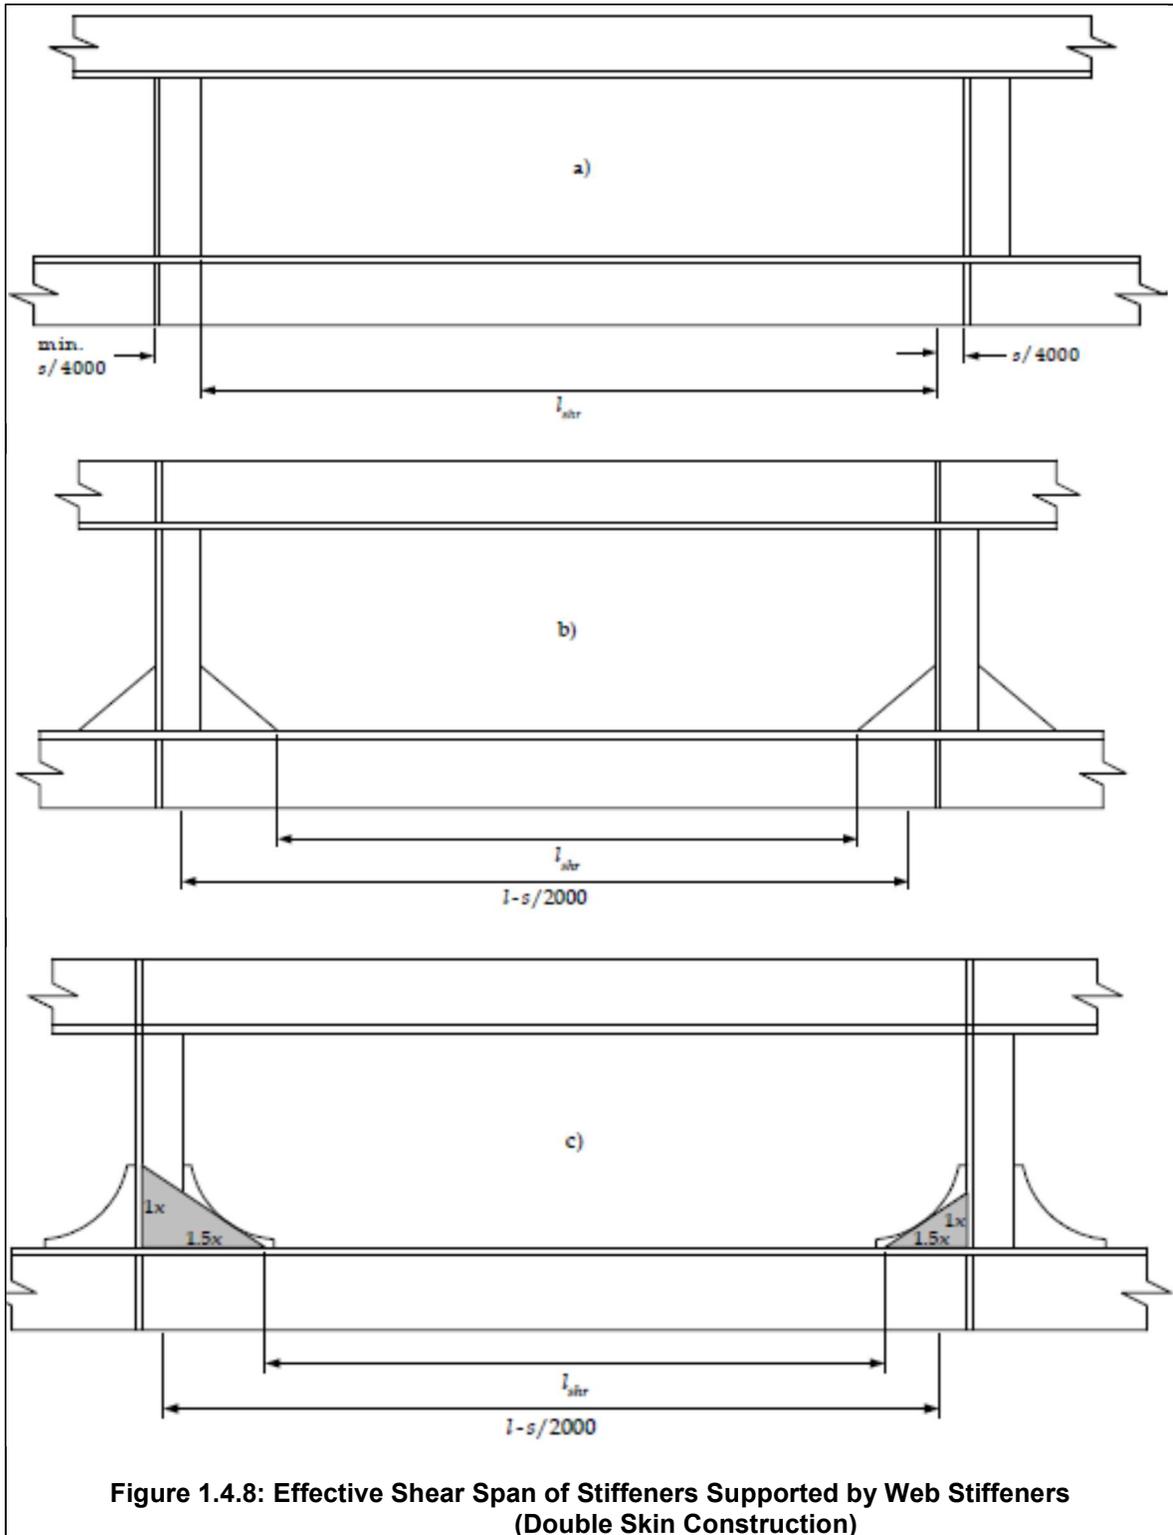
Effective Shear Span of Stiffeners Supported by Web Stiffeners (Double Skin Construction)
